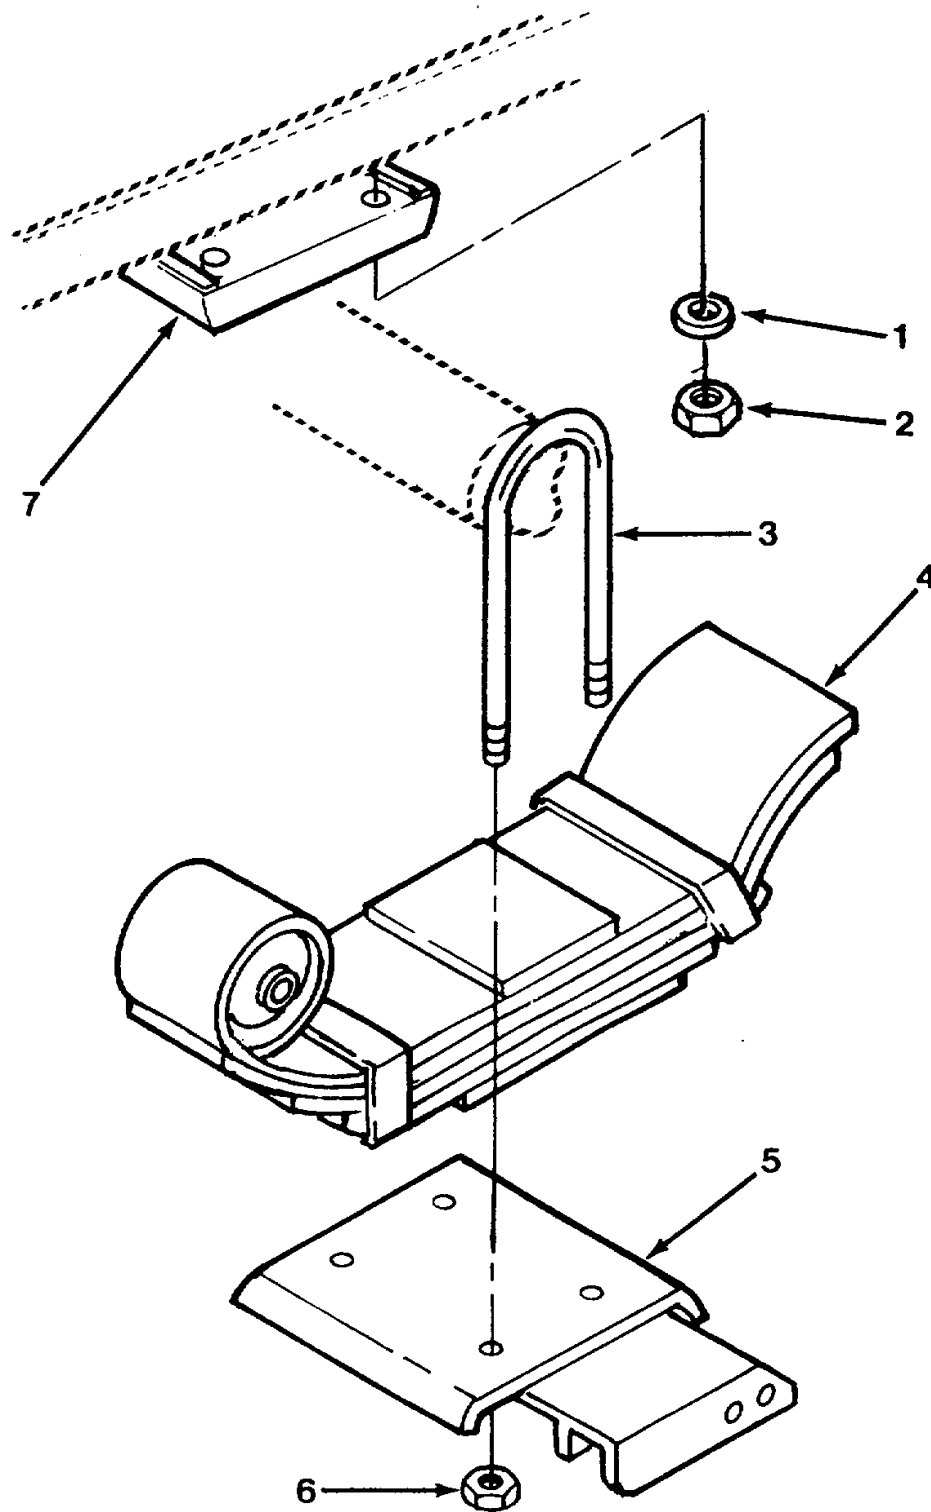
SPRINGS AND MOUNTING HARDWARE
